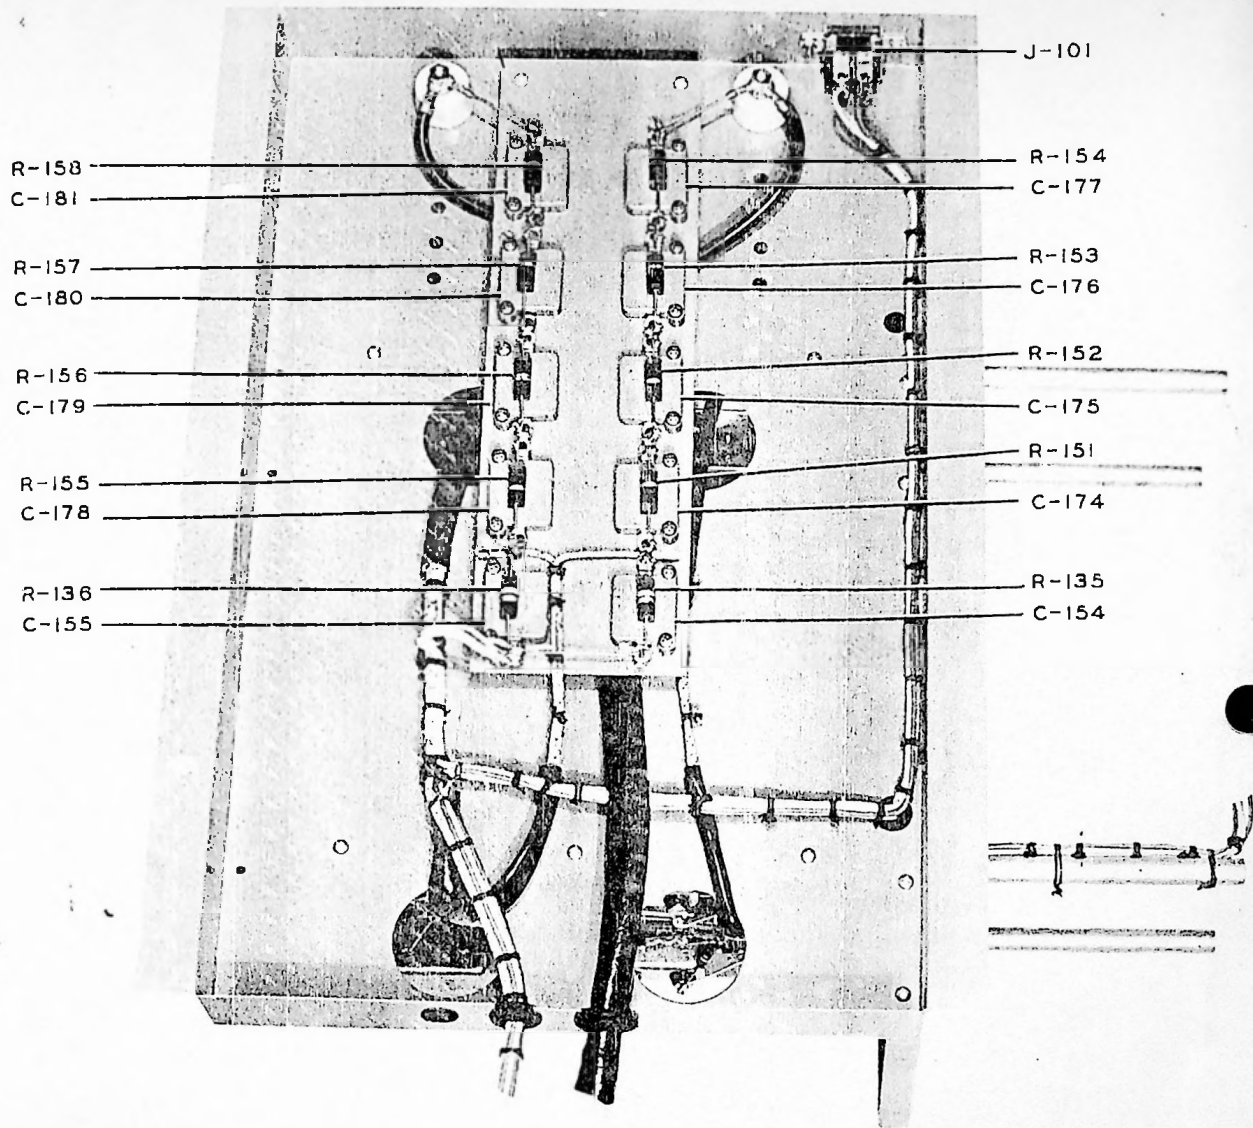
Audio Chassis Parts Arrangement, Side View
